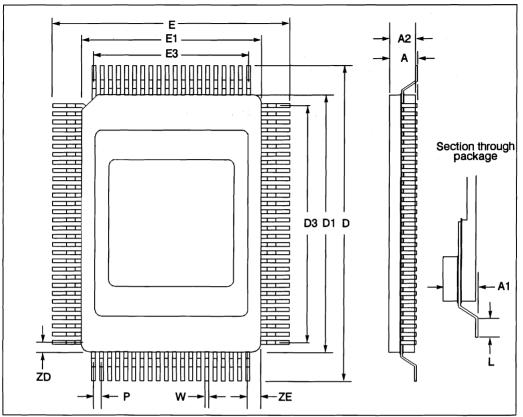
100 pin ceramic quad flatpack package dimensions
